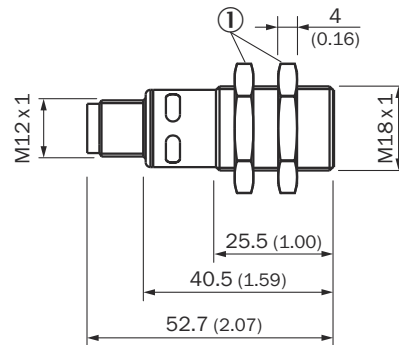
Structure and device dimensions, unit: mm (inch), decimal separator: period
